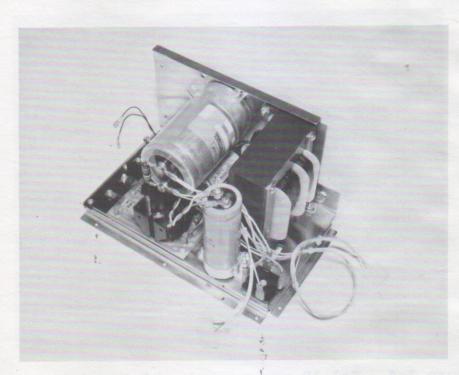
Sol-20 power supply subchassis assembly. (Rear of subchassis at left.)
